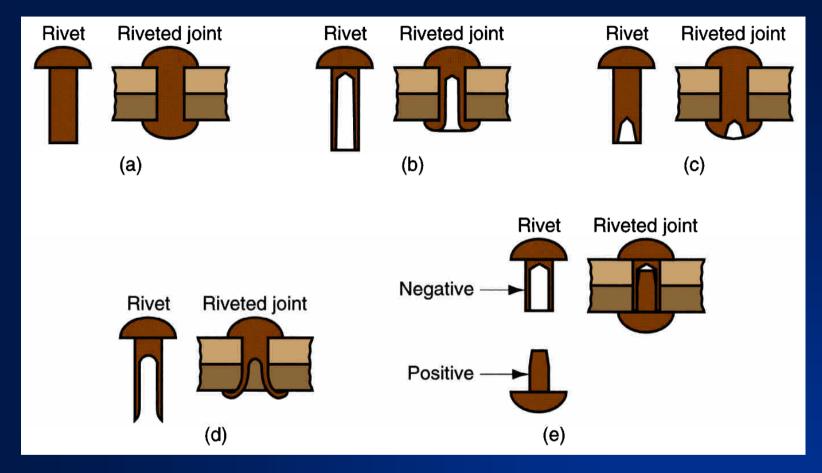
Five basic rivet types, also shown in assembled configuration: (a) solid, (b) tubular, (c) semitubular, (d) bifurcated, and (e) compression
